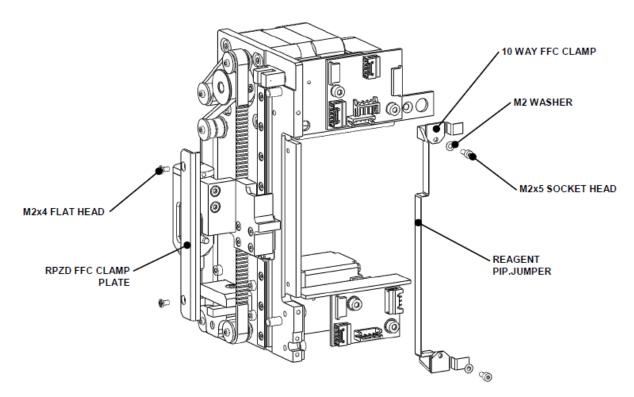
Mounting the PCB (the Z drive PCB is the upper board)
